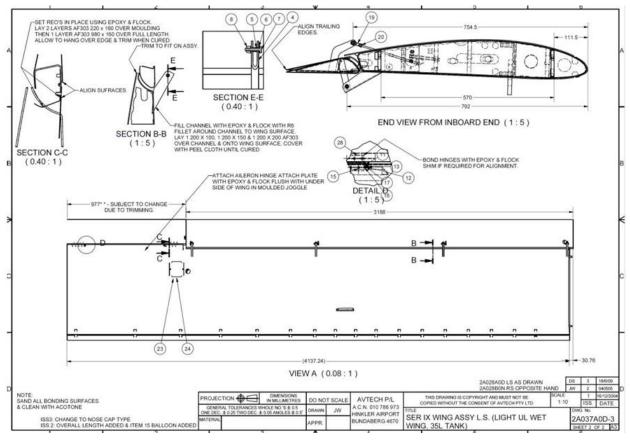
J170-UL Wing Assy Sheet 2 Ser IX (J170)
